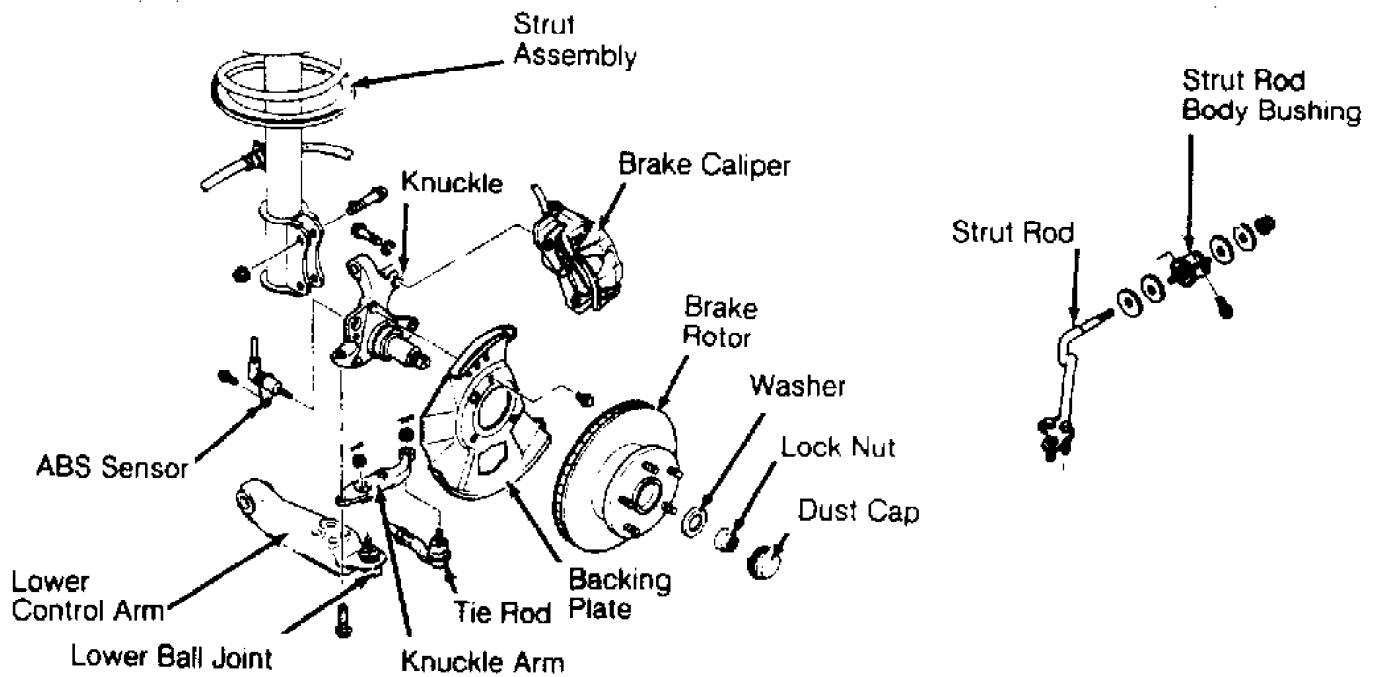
Exploded View of Front Suspension (MPV & 929)
